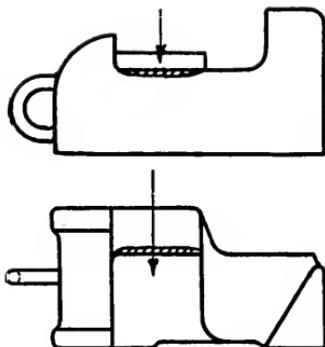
Reclaimed Major Knuckle Locks by Electric Weld
